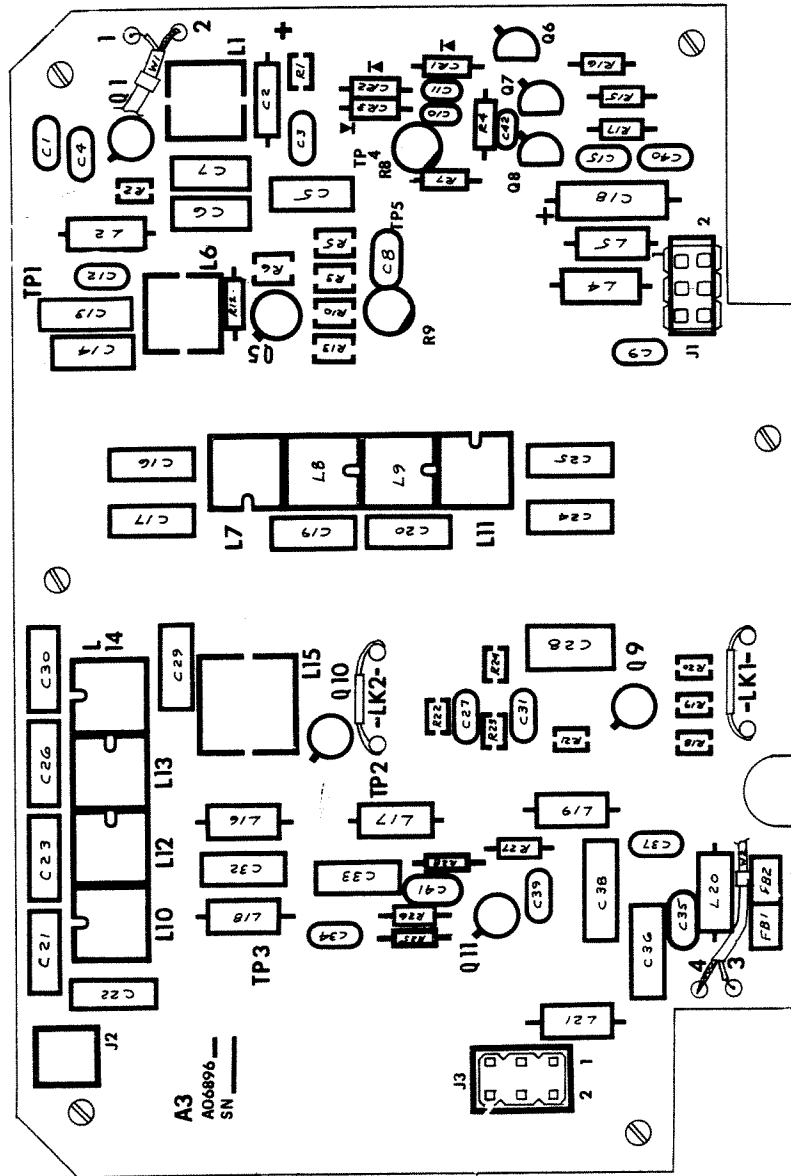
B. Second Mixer, A3 Circuit Card Assembly
